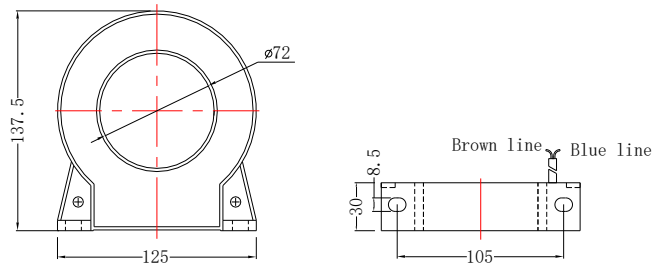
Overall Dimension of CT Module in 500A and 820A
